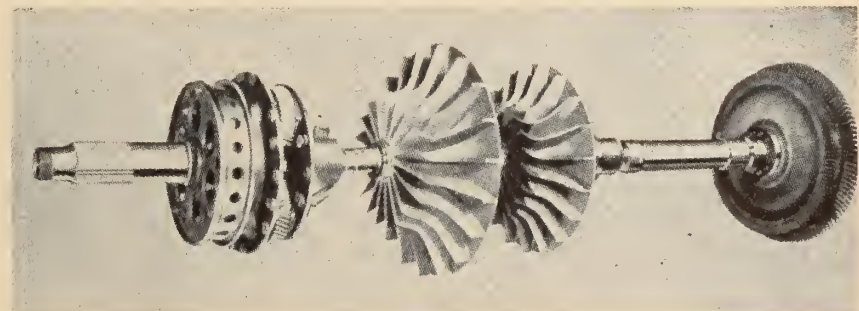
Rotating component of the Rolls Royce Dart Engine — the propeller reduction gear to low and high pressure single sided centrifugal impellers and two-stage axial flow turbine.
